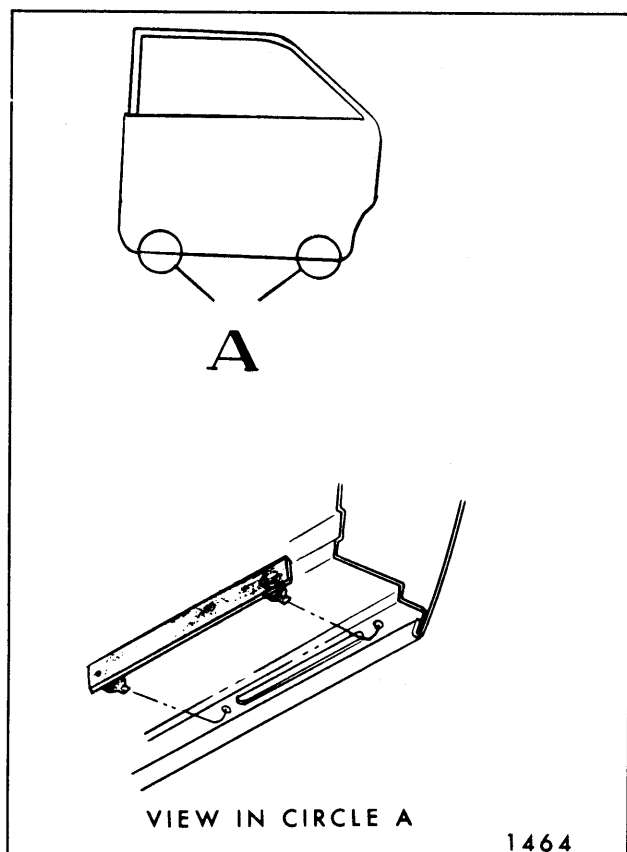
Door Bottom Drain Hole Sealing Strips
